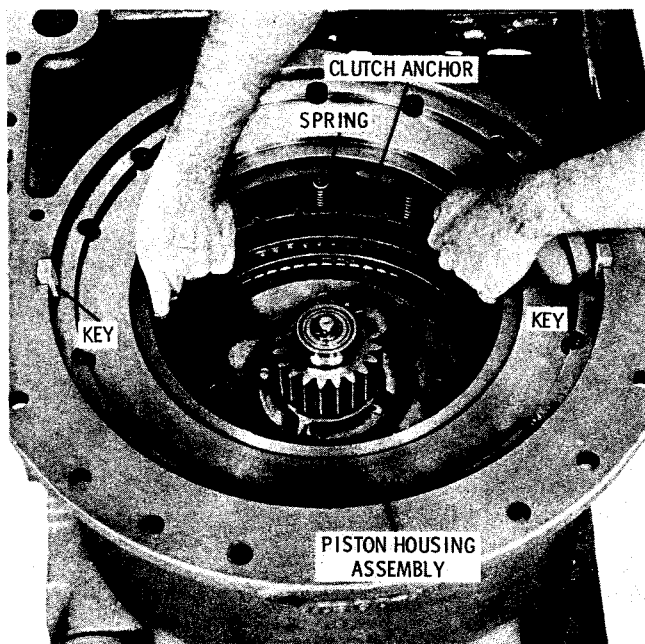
Removing intermediate-range clutch piston housing and piston S1613
